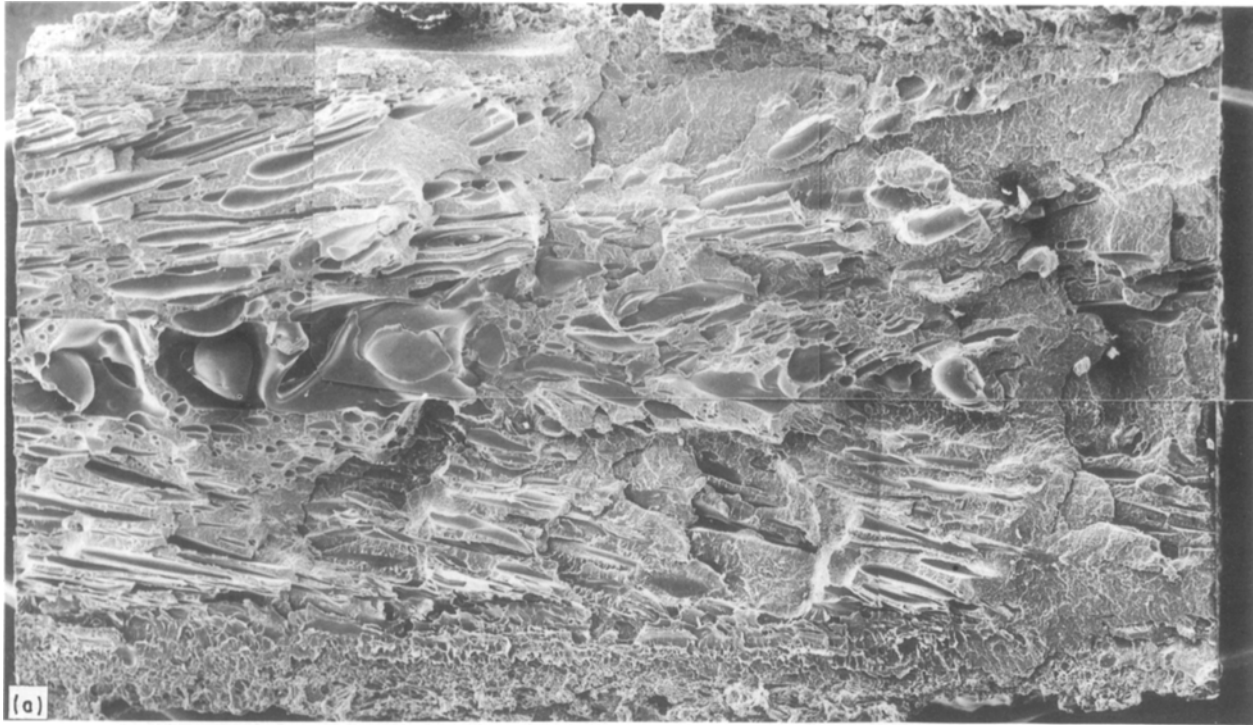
Fracture surfaces (6.35 mm × 12.7 mm) of a 25% density reduction M-PPO-SF welded specimen (Specimen 4: $p_0 = 0.9$ MPa, $\eta_F = 0.62$ mm).
